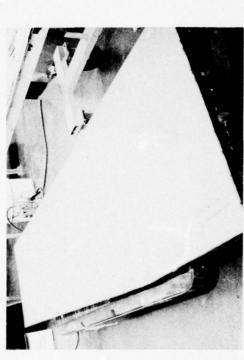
GLASS/EPOXY SPOILER MOLDING TOOL
